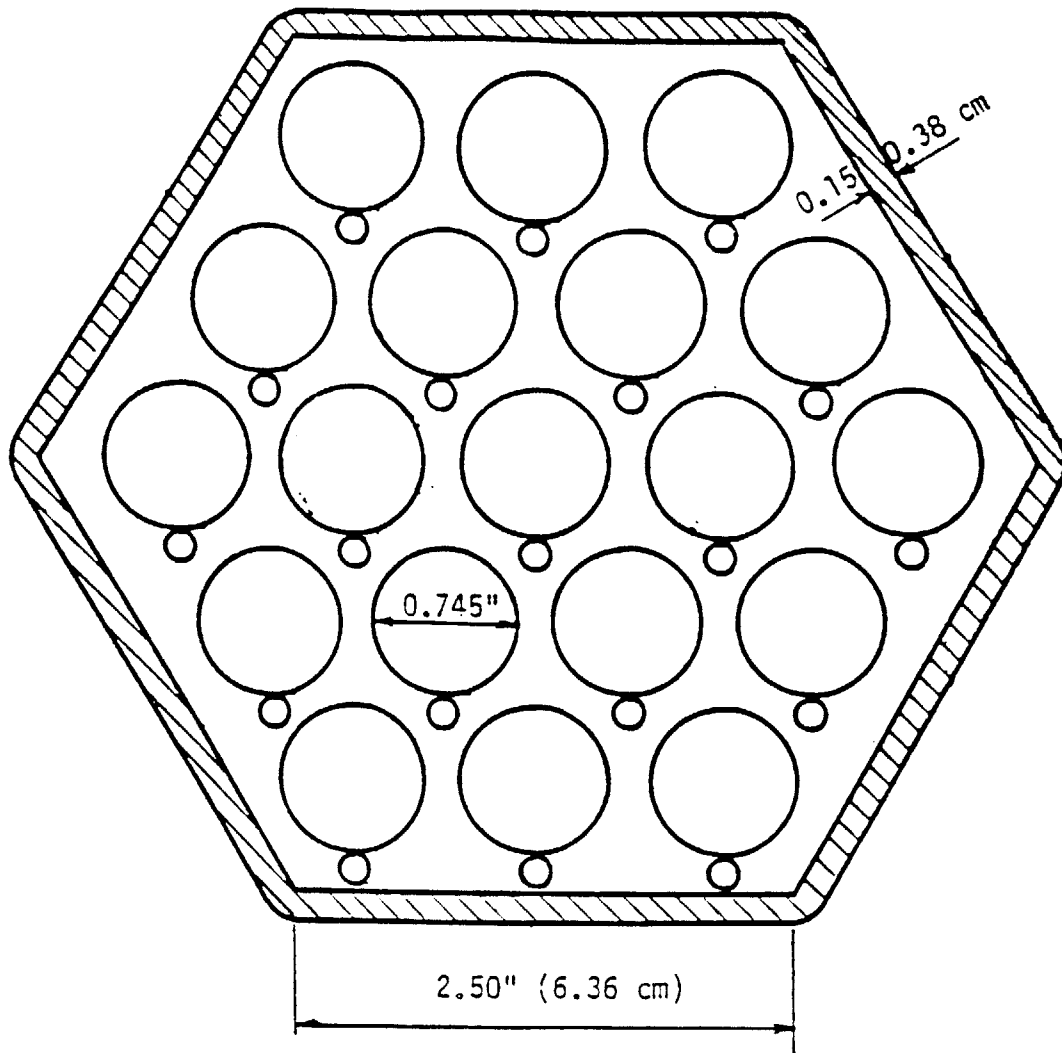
TEST SECTION CROSS-SECTION.
